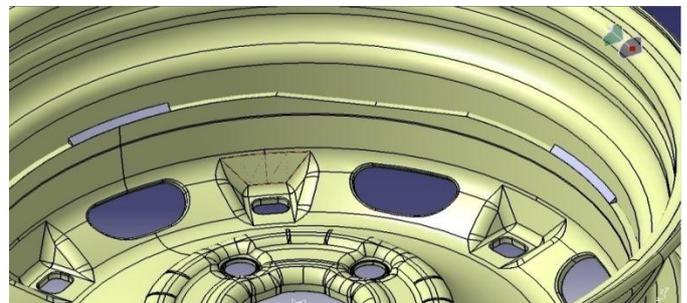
Weld model in CATIA using RIMS Concept
